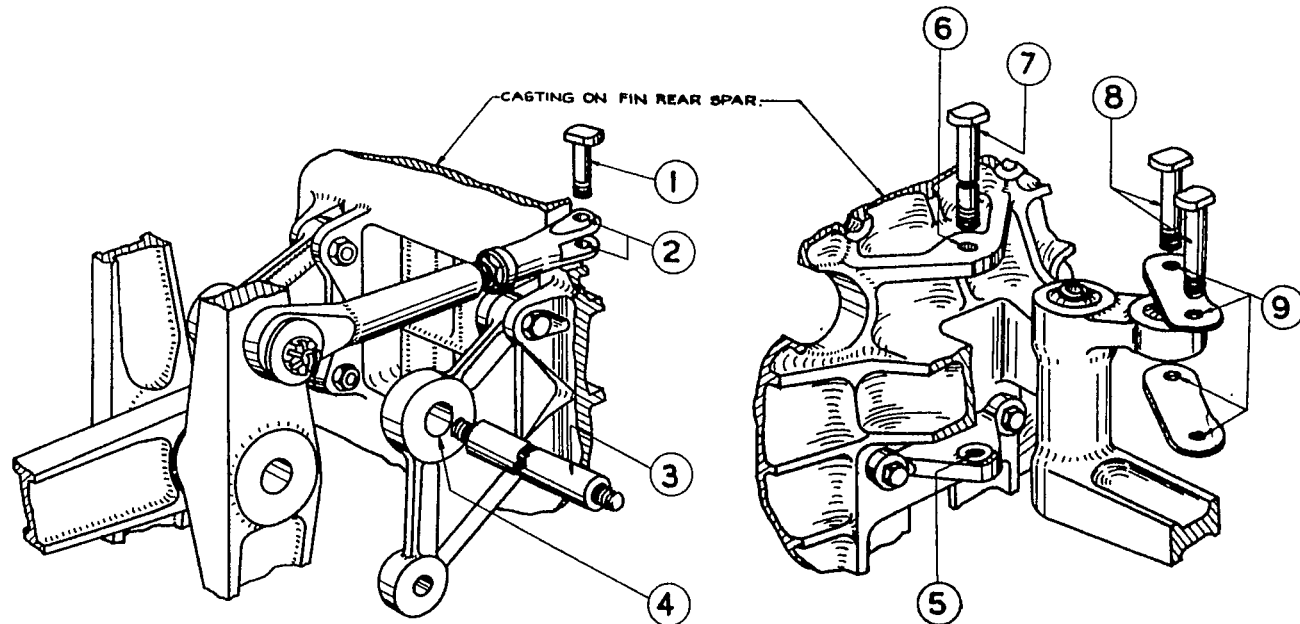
/25 EXPLODED VIEWS OF CONTROL FITTINGS — TAIL BOOM REAR END.
